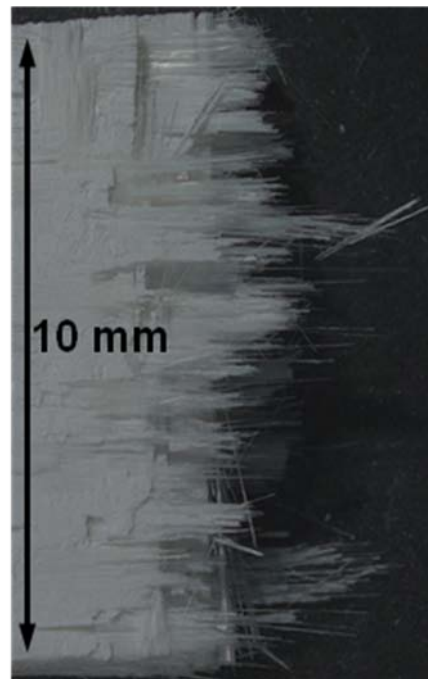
Fracture surface of the N720/AM specimen tested in tension to failure with constant loading rate of 0.0025MPa at 1100°C in steam.
